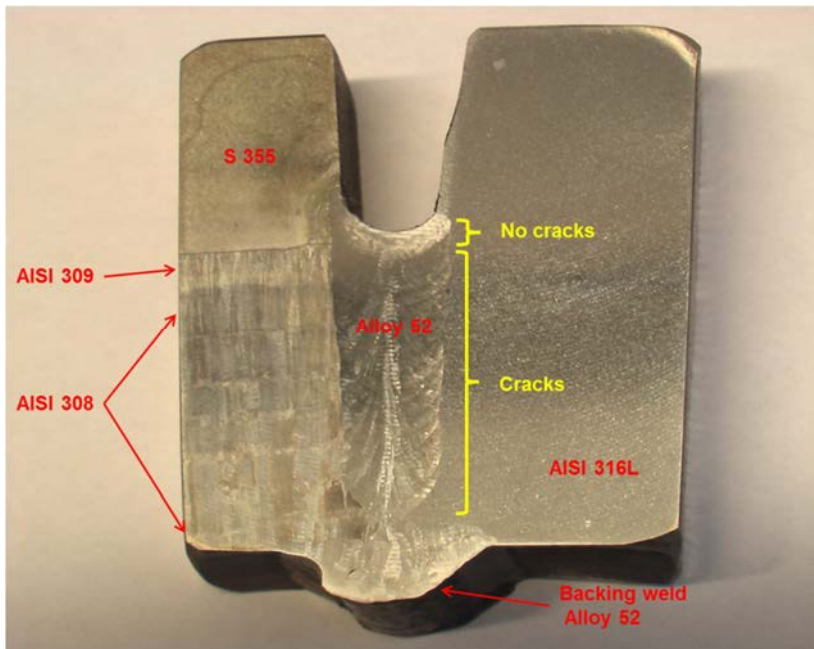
Thick AISI 309 and 308 submerged arc strip cladding welded on S 355 carbon steel plate and machined NG groove.
